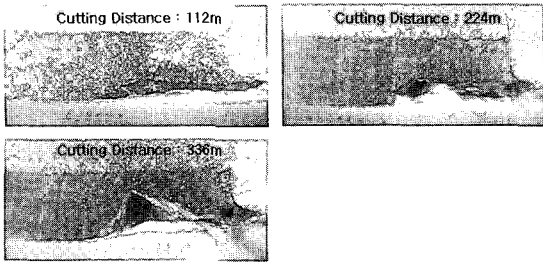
Photographs showing progressive wear on the flank surface of $\Phi 2\text{mm}$ ball endmill for $a_e=0.4\text{mm}$ ($a_p=0.1, f_z=0.06, V_c=110\text{m/min}$)
